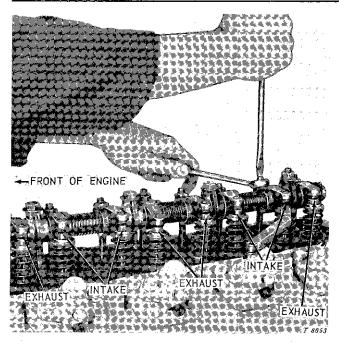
Adjusting Valve Tappet Clearance
